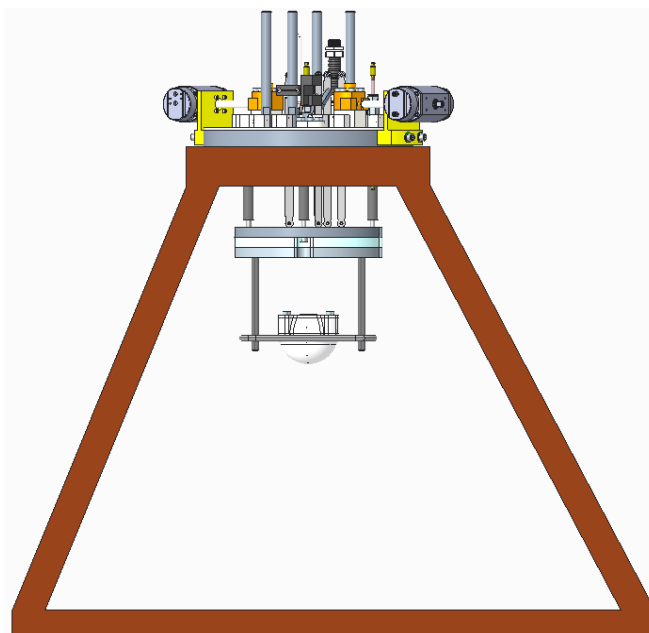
Overview of HE Support load test with Top Cover secured to Barolo Assembly Stand.
